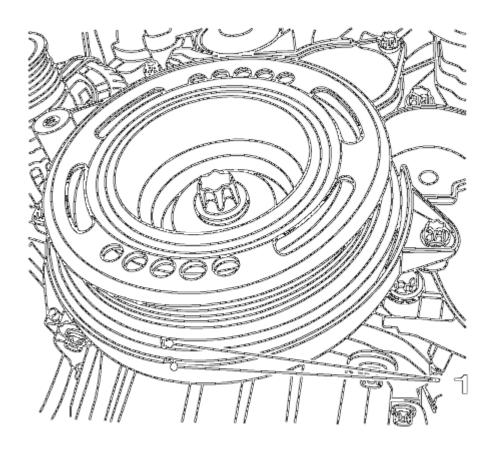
View Of Crankshaft TDC Position Courtesy of GENERAL MOTORS COMPANY
